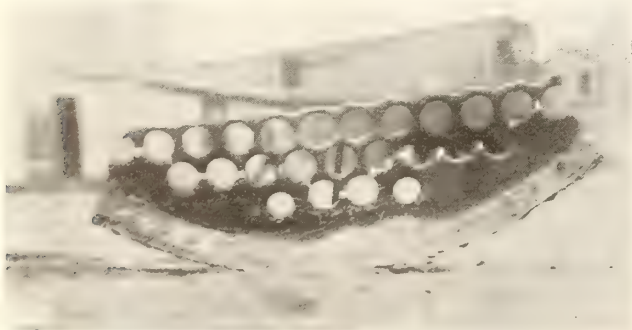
DEFECTIVE TUBE SHEET CUT FROM PLACE IN LOCOMOTIVE BOILER.
